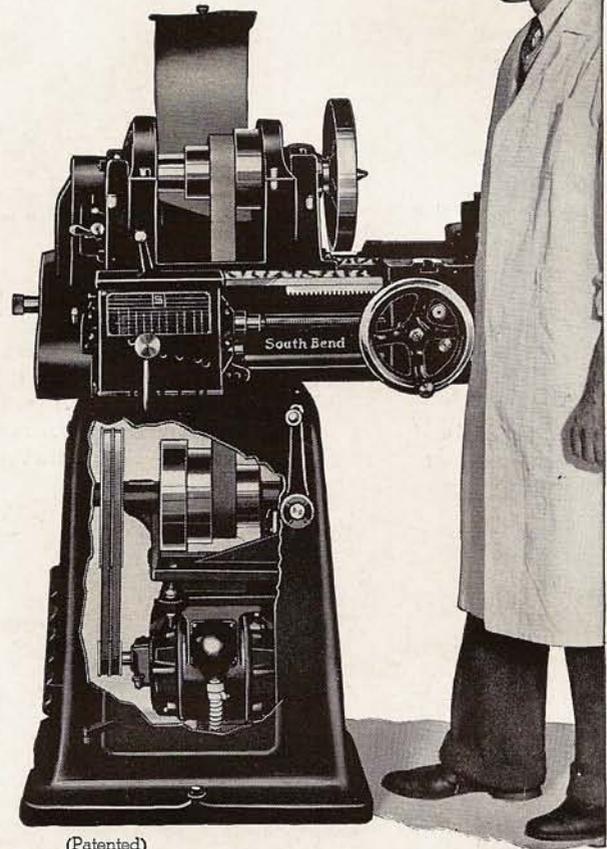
Cross Section End View of the Underneath Belt Motor Drive Precision Lathe Showing Principal Parts of Drive.
